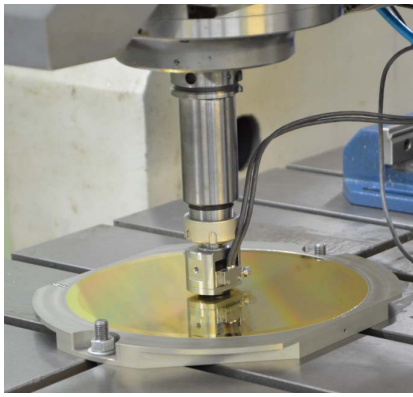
Performing circle test according to ISO 230-4 standard on the planing and milling machining center Э7106MФ4 using the Grid Encoder KGM
